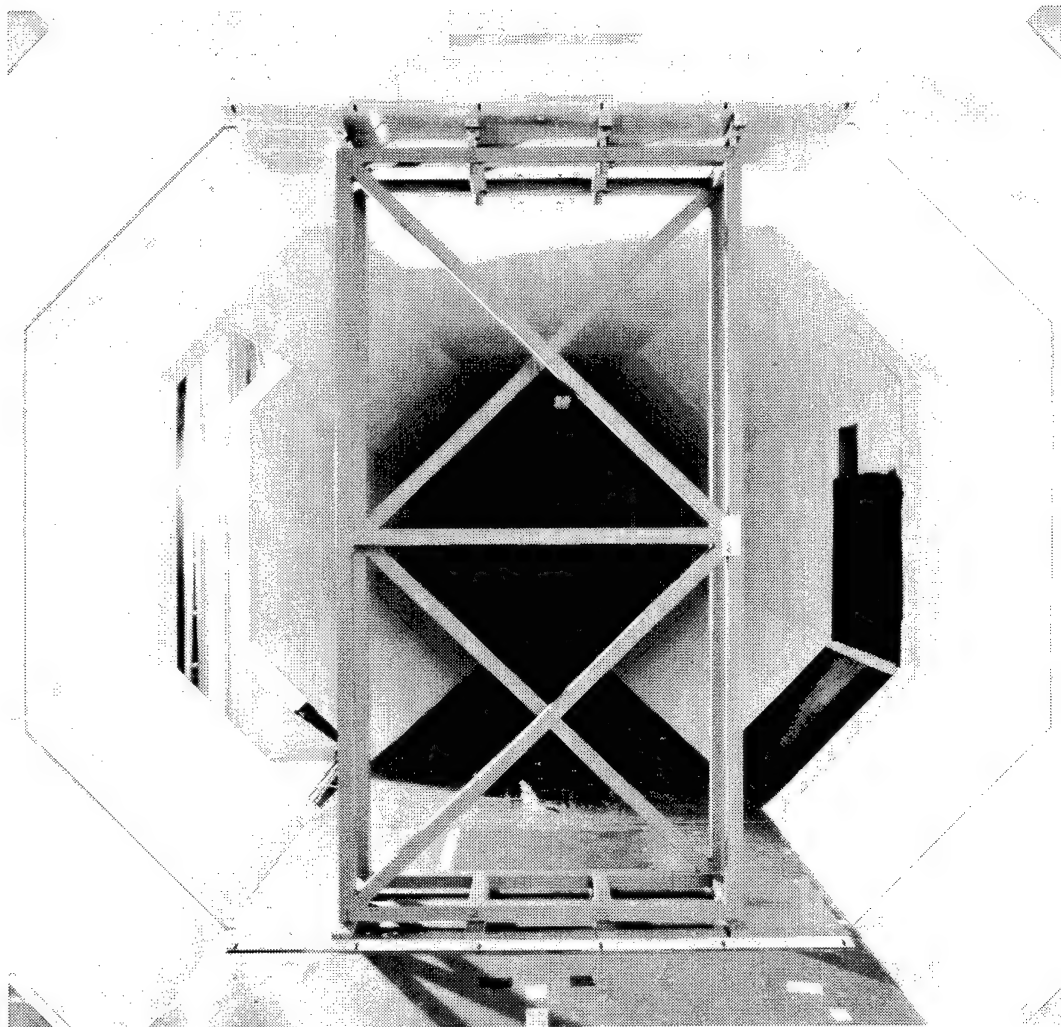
Alignment frame used when locating the upper plate of the traversing mechanism on the test section roof with respect to the lower plate on the floor.
